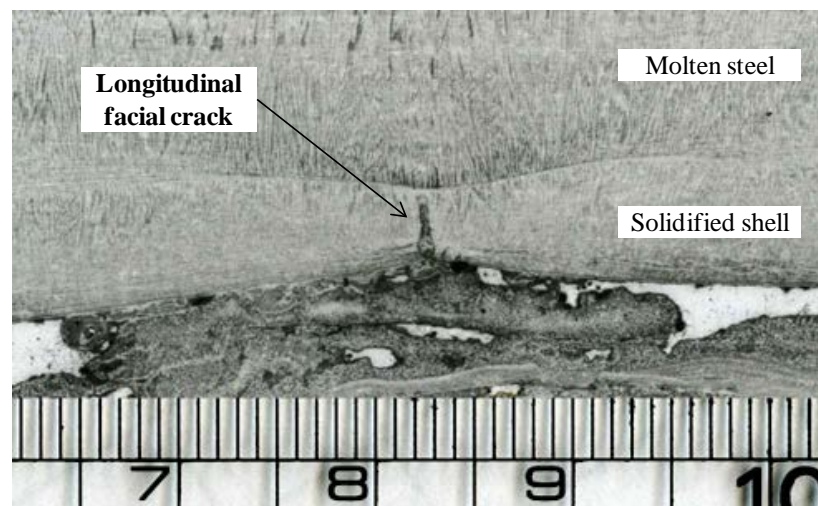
Cross section of a depressed area showing the occurrence of longitudinal facial cracks on the shell surface due to depression. Etched by picric acid for delineating liquid/solid interface (found near breakout point of slab in a thin slab caster, Gwangyang Works)
